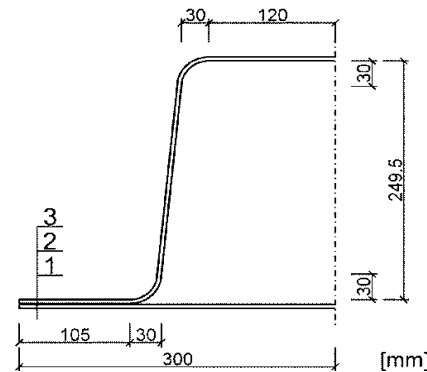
Cross-section of BG/F composite box beam: 1 - bottom shell BS (4 mm), 2 - adhesive layer (0.5 mm), 3 - top shell TS (4 mm)
